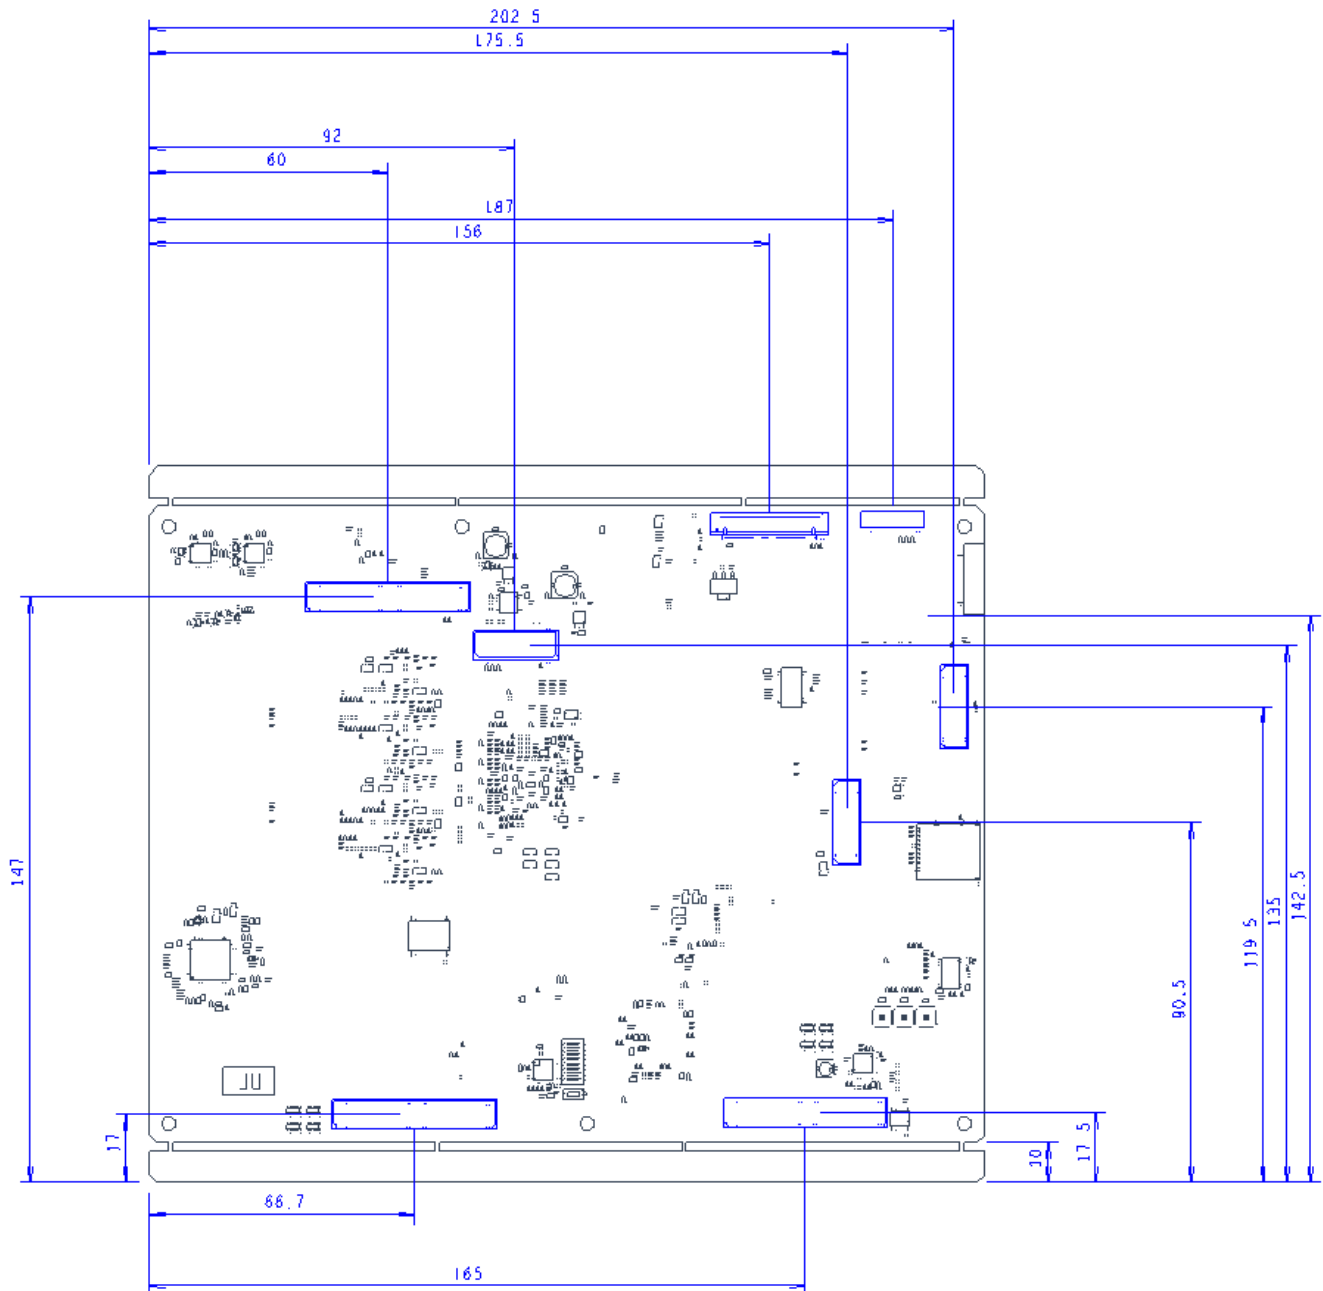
Connector Locations of the GOSE board (Solder Surface) (Top View)
